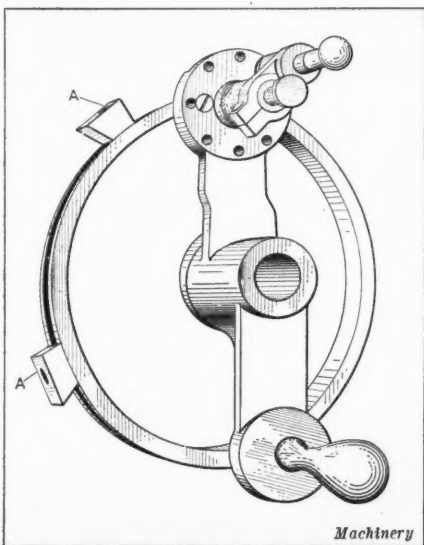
Special Index Crank designed for Use on Norton Plain Grinding Machines for truing Different Diameters on Wheel Face
